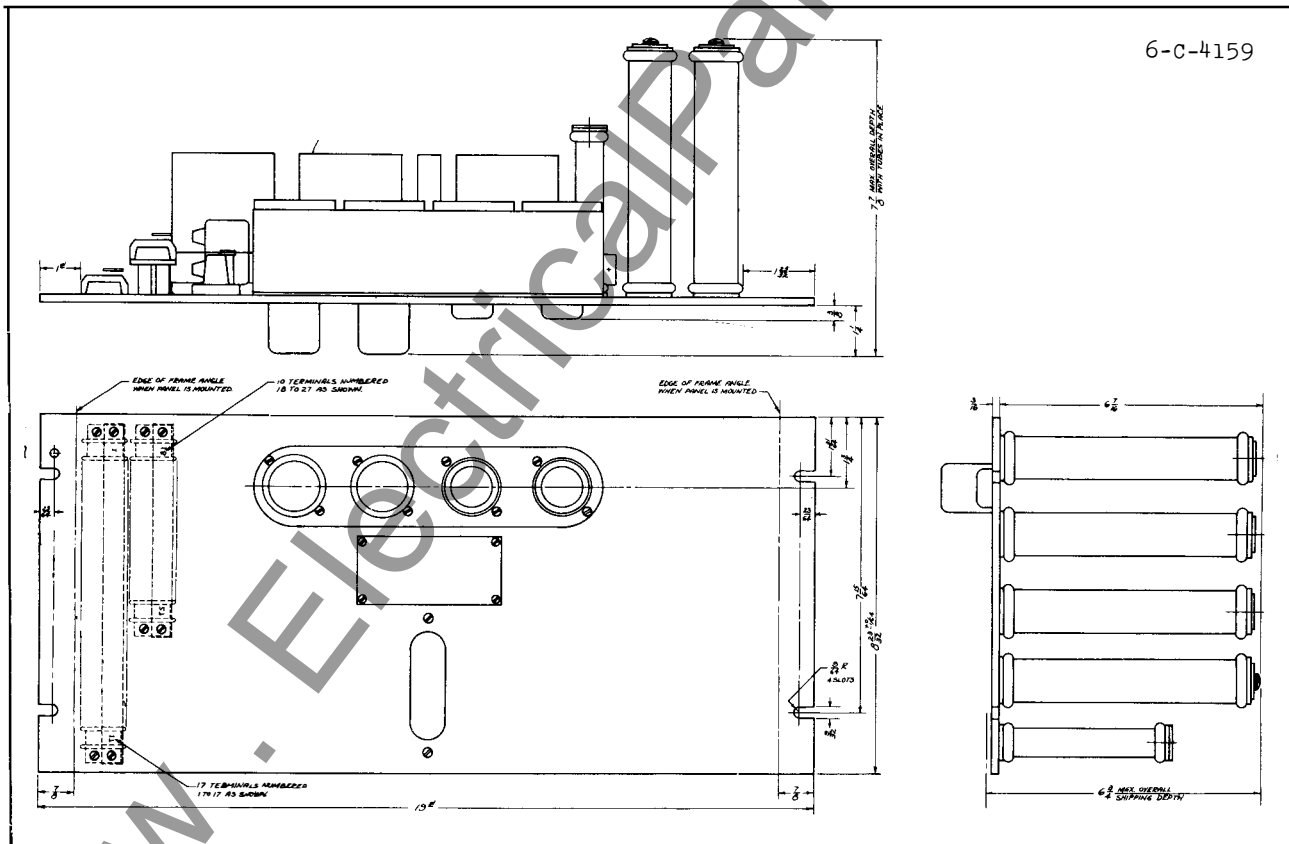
Outline And Mounting Plan Of The Type HKB Control Unit For Type JY Carrier. For Reference Only.
